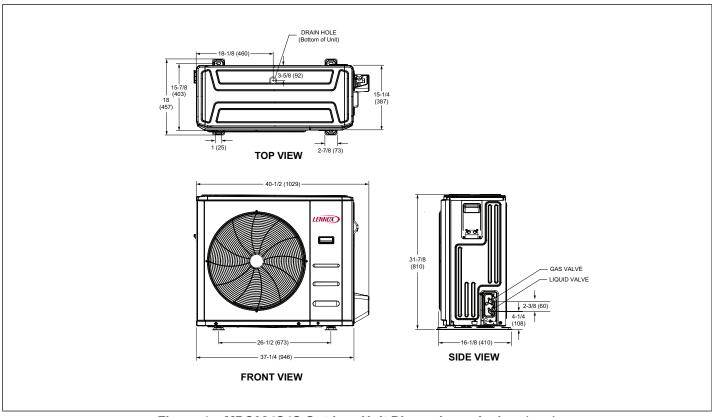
MPC024S4S Outdoor Unit Dimensions - Inches (mm)
